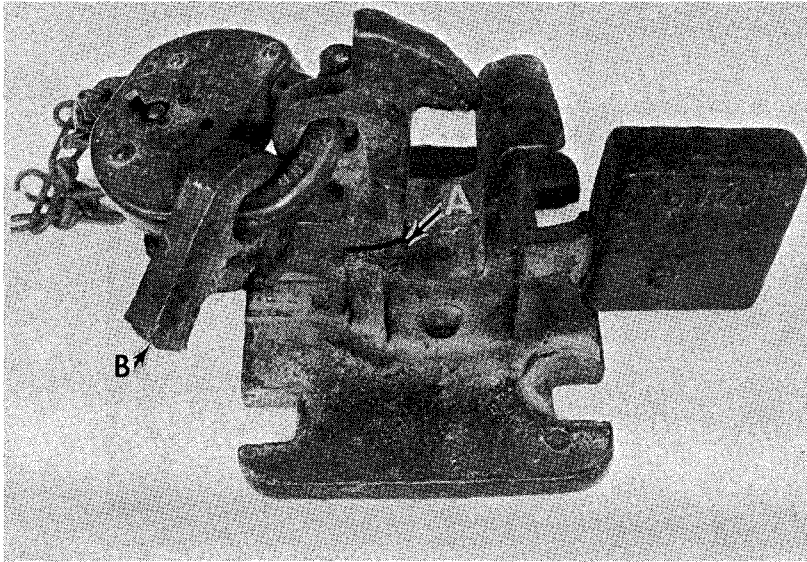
Switchstand as received. Arrows "A" and "B" denote mating fracture surfaces on lock arm. X 1/5
